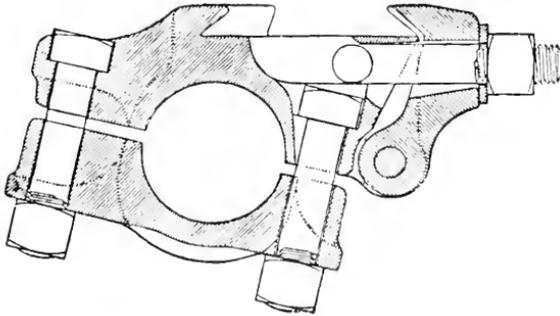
NEW PATTERN CLAMP, USED FOR HOLDING THE SERGEANT DRILL UPON THE ARM OR COLUMN.
